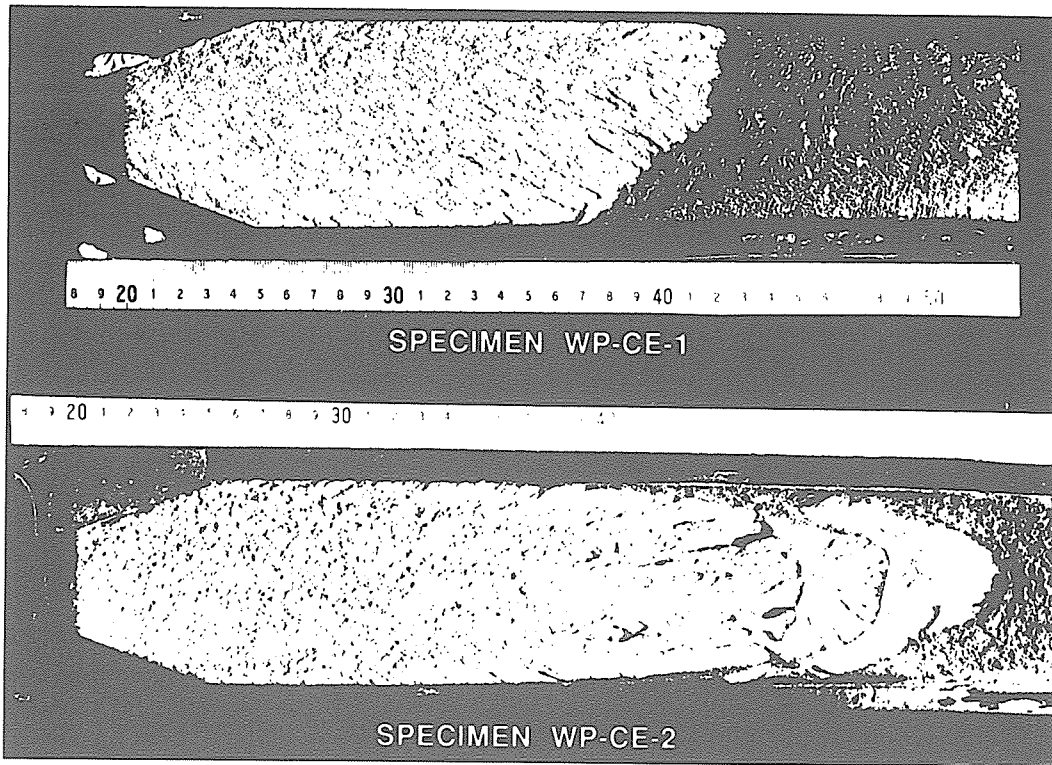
Fracture surfaces of specimens WP-CE-1 and WP-CE-2.
